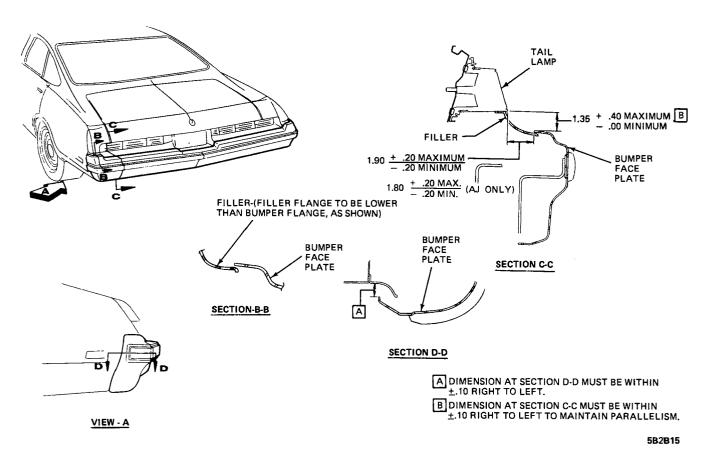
B-15 A Series (Less Wagon) Rear Bumper Clearances
